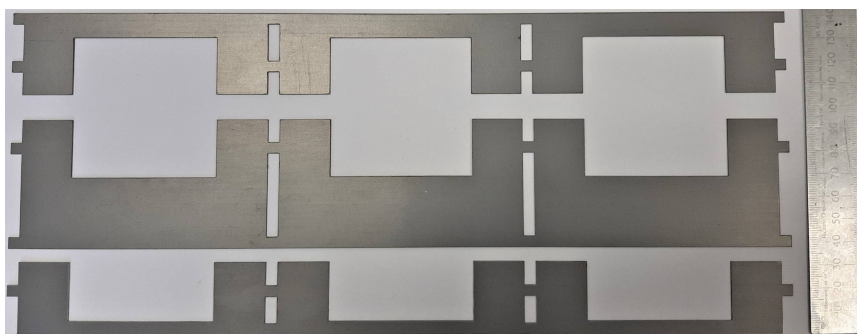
Laminations (a) Stator, (b) Rotor primary, (c) Rotor filler
